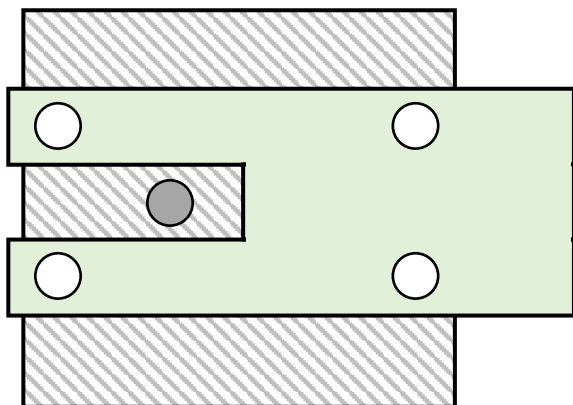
This is the discarded solution. The metal bracket would most likely need to cut to fit – it's unlikely that a bracket like this would exist off-the-shelf. In each Figure, the *white* holes represent the mounting holes, the *grey* hole represents the Axle of the Flywheel, the *green* area represents the bracket and the *grey hatched* area represents the bike frame
